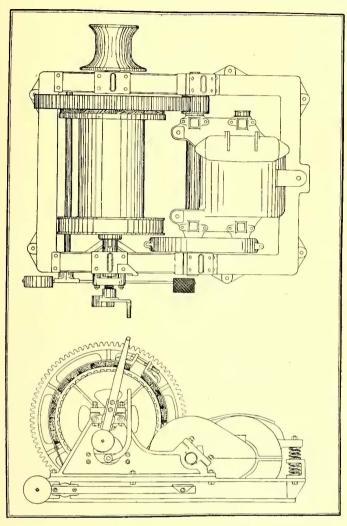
PLAN AND ELEVATION OF ELECTRIC HOIST
